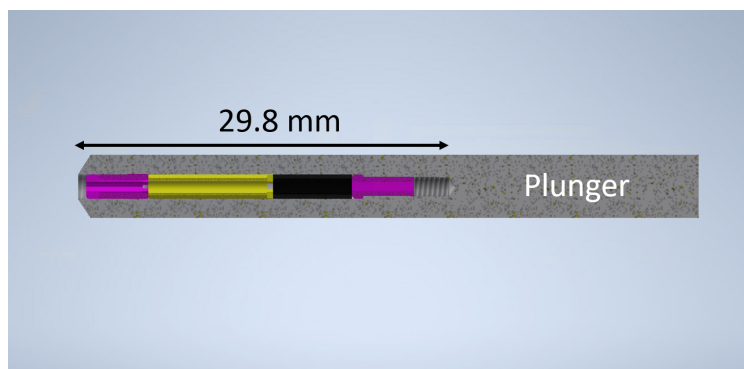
CAD drawing of the plunger along with the differential screw assembly.
